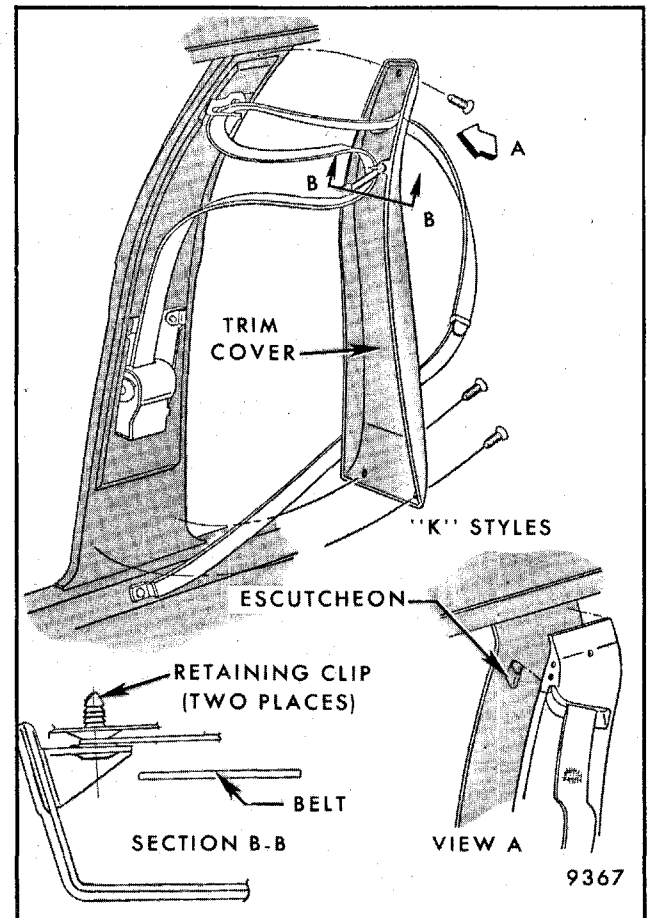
Center Pillar Trim Cover - Removal and Installation - Cadillac 6KS69 Styles
